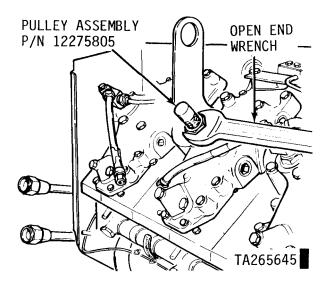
Removing fuel injector nozzle capnut with puller assembly.
